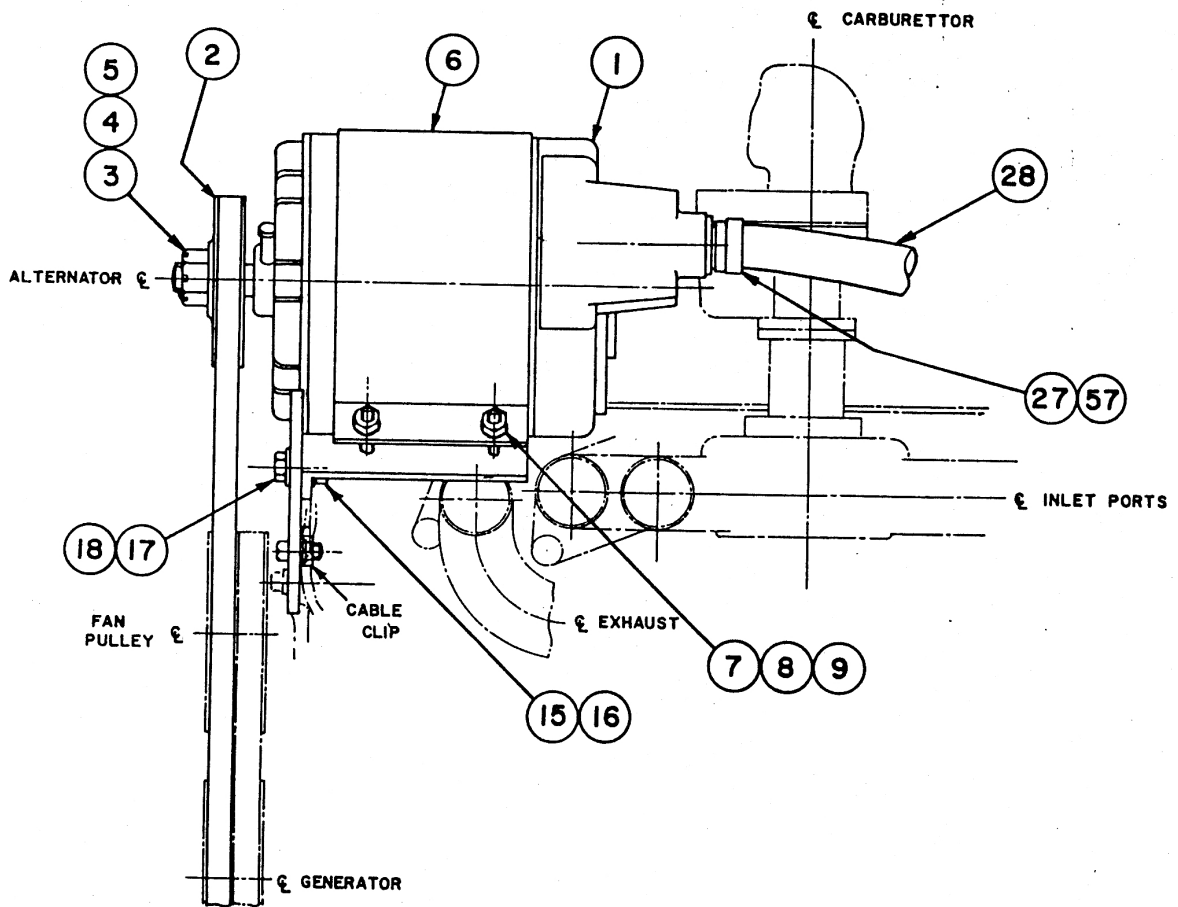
FITTING OF ALTERNATOR TO ENGINE - SIDE ELEVATION
